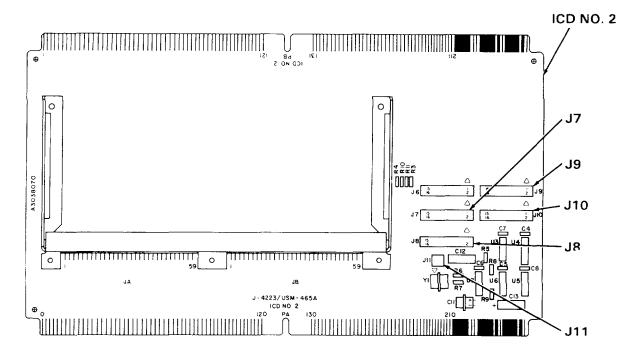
Cable Connection Points and Components Used During Panel Board Test (Sheet 2 of 2)
